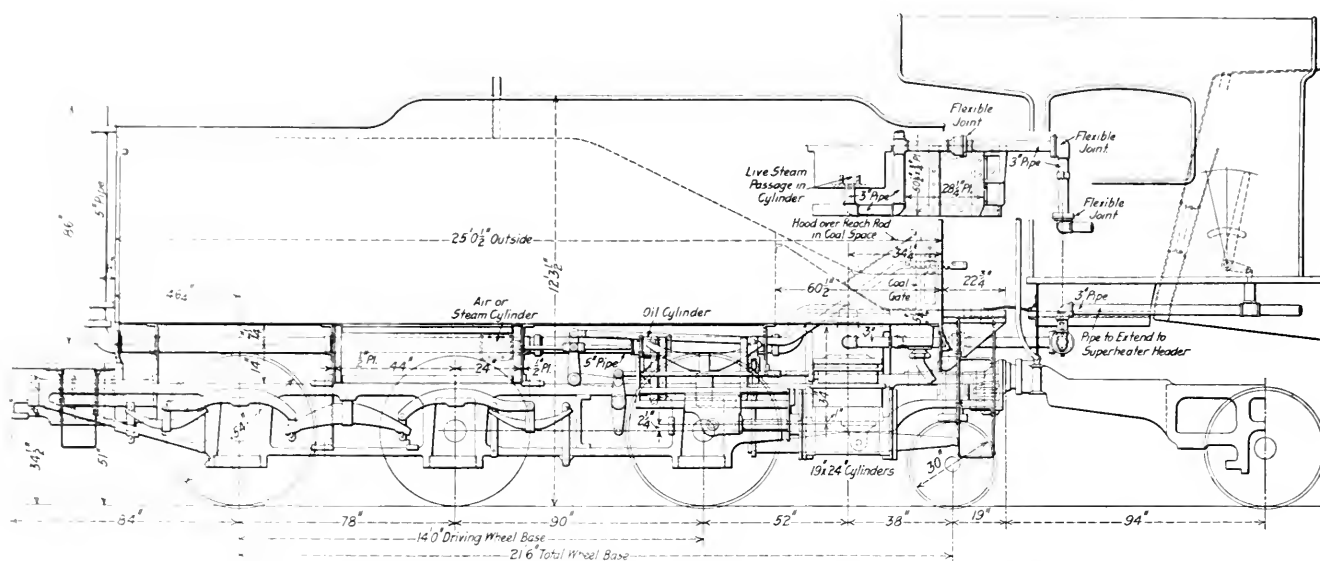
APPLICATION OF MOGUL RUNNING GEAR AND MACHINERY TO WATER TANK OF MIKADO LOCOMOTIVE
